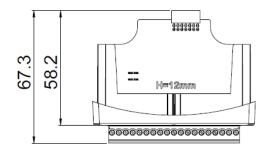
WISE-S600 Series I/O Module Dimensions
